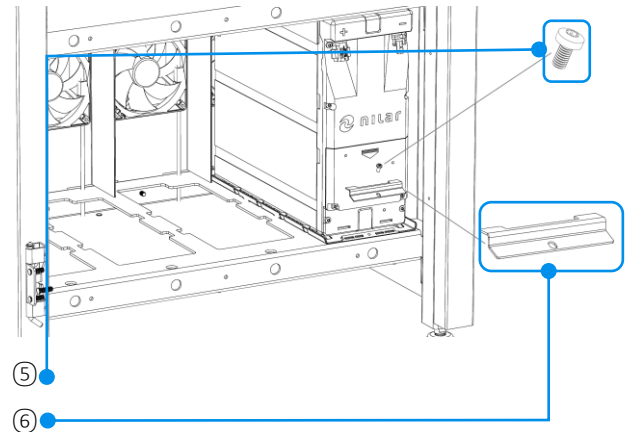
Battery pack prior to attachment with indication of fixation screw and battery front holder
